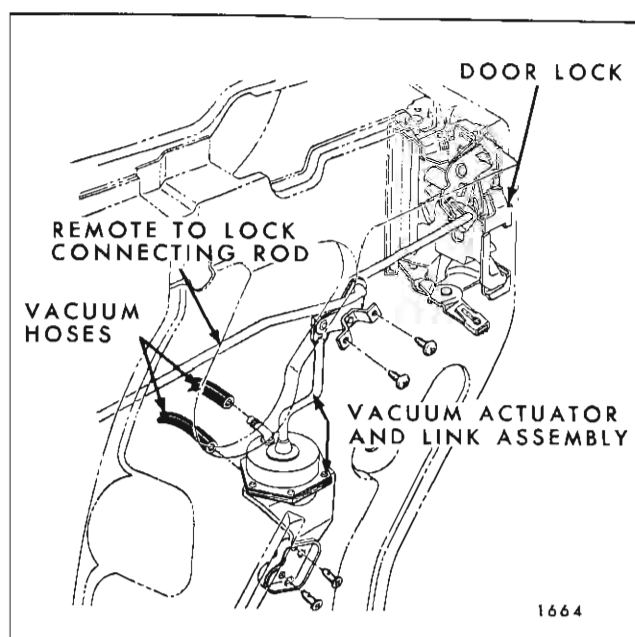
D82—Rear Door Vacuum Lock Actuator and Link Assembly - 68069 Style
